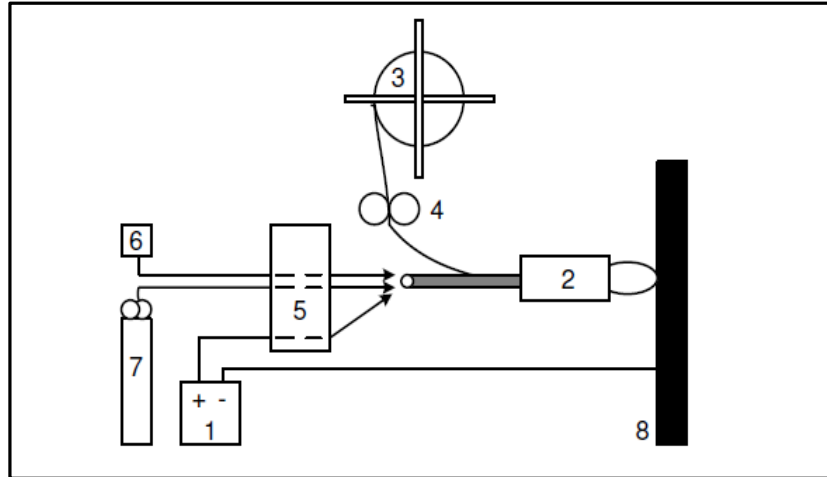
Sketch of MIG welding equipment. 1) Source of power, 2) Gun, 3) electrodes 4) wire feeding equipment, 5) controller, 6) water, 7) gas, and 8) work piece.
